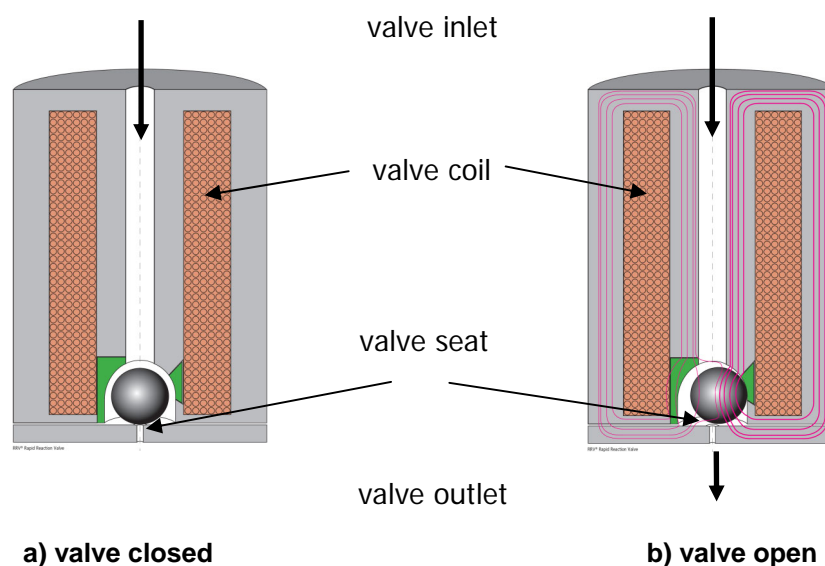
Schematic drawing of a RRV[®]. The shape of a magnetic field line is shown.
